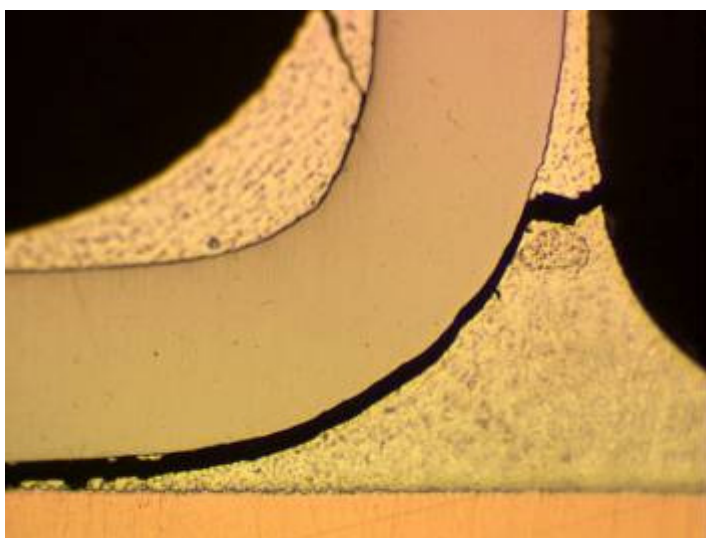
cross section, SN63, U16, left lead solder crack, 200xb
